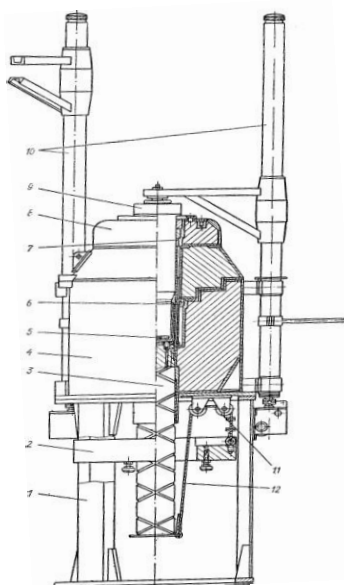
Structural scheme of the "Issledovatel" gamma-installation: 1 - bed; 2 - counterweight; 3 - stock; lead container (radiation head); 5 - work table; 6 - cylindrical irradiator; 7-beam shutter; 8-shutter body; 9-cork; 10-lift mechanism; 11 - blocks; 12- cables.
